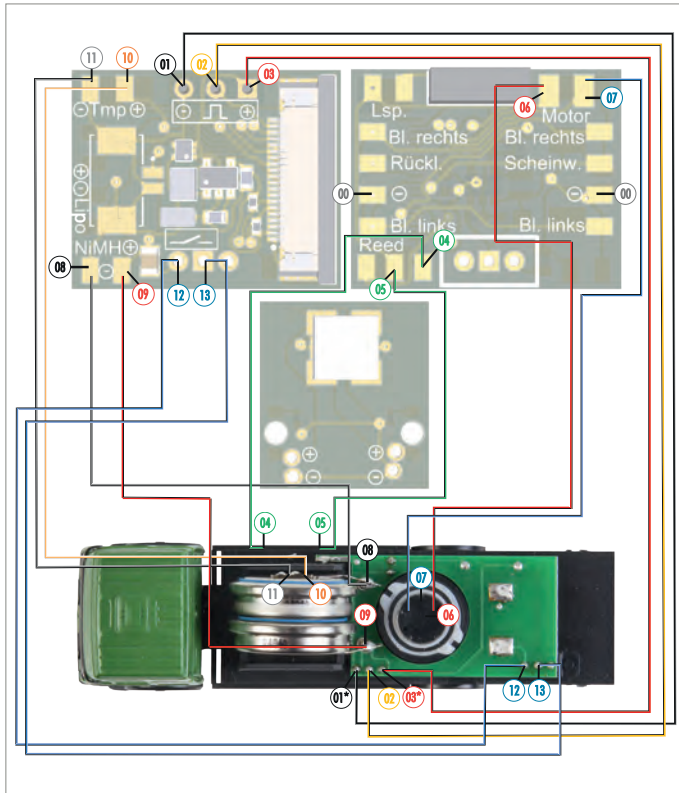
Wiring diagram, truck model with universal circuit board, batteries soldered.
